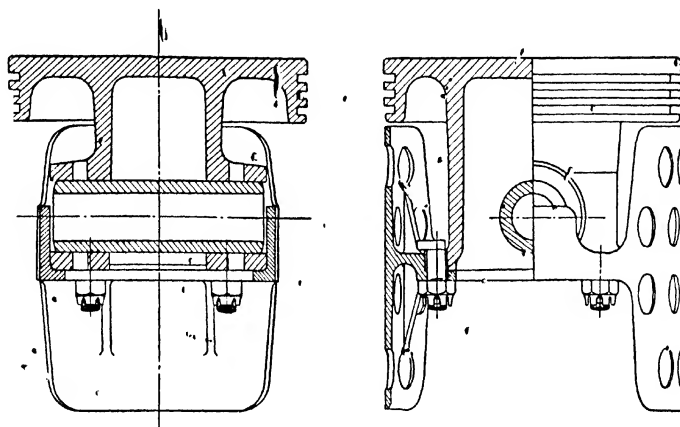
Composite Piston with Aluminium Head and Cast-iron Bearing Surfaces rigidly attached
